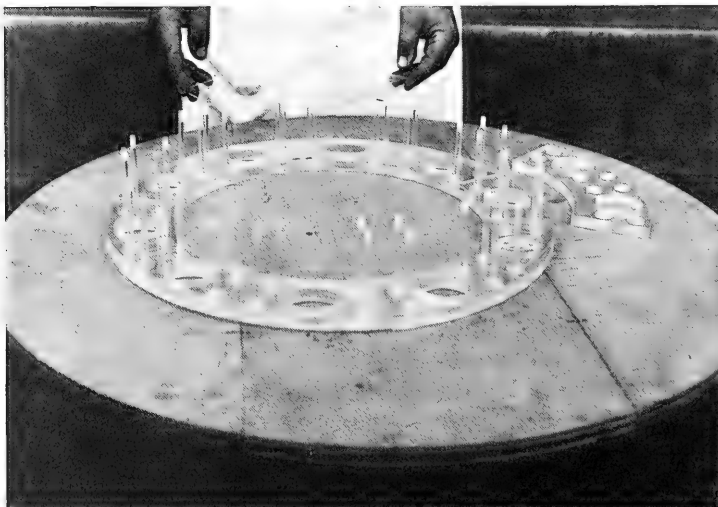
Assembling the segmented end-closure retaining flanges from 0.067-inch-thick acrylic segments.
